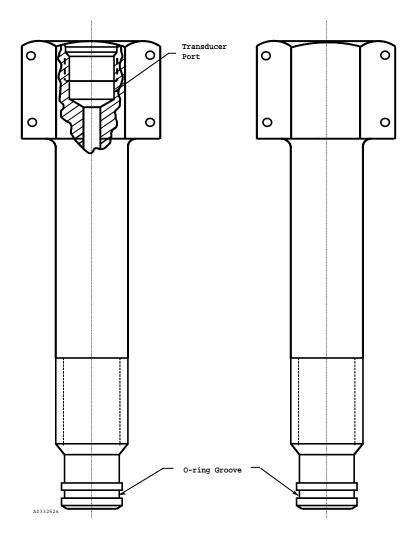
Special Bolt With Transducer Port and Solid Special Bolt
